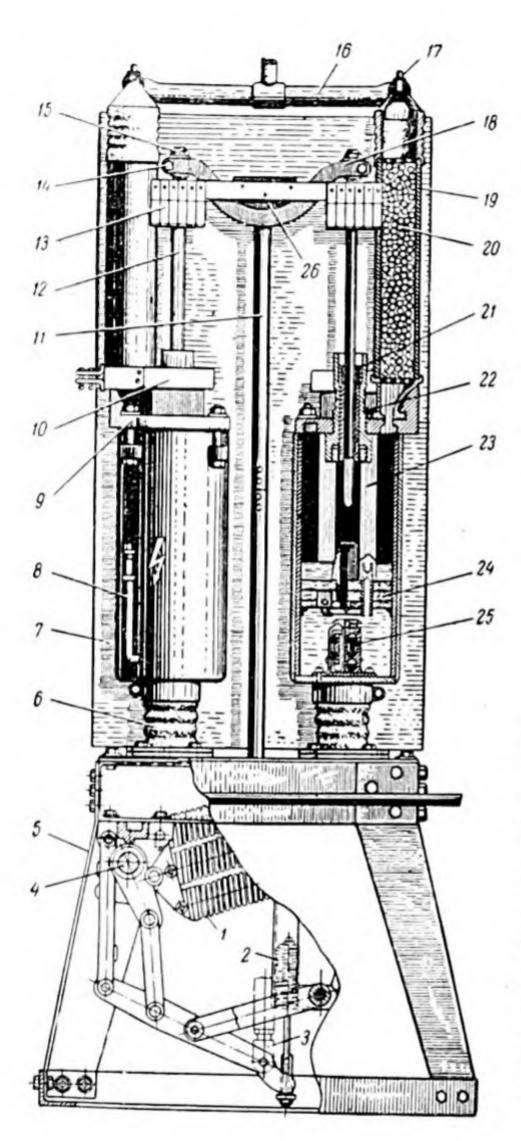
Sectional view of the MΓΓ-299 oil circuit breaker:
